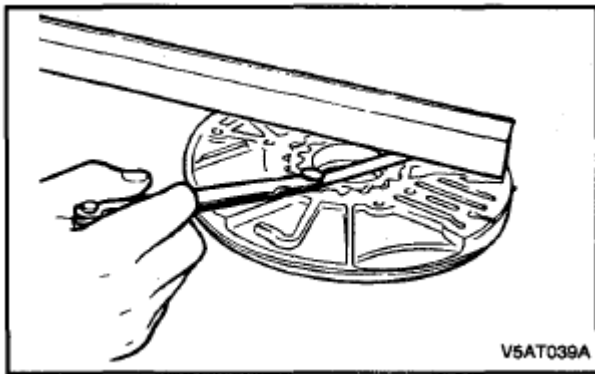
Measuring Side Clearance Of Oil Pump Gear
